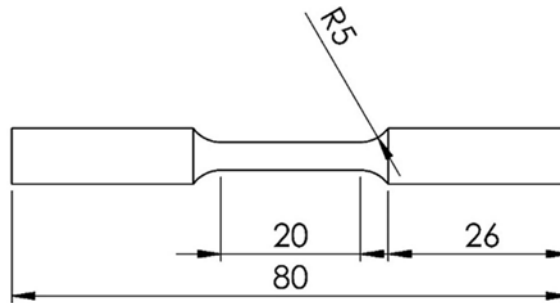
Dimensions and the geometry of tensile L-PBF Ti-6Al-4V specimen investigated in this study. All dimensions are in mm.
